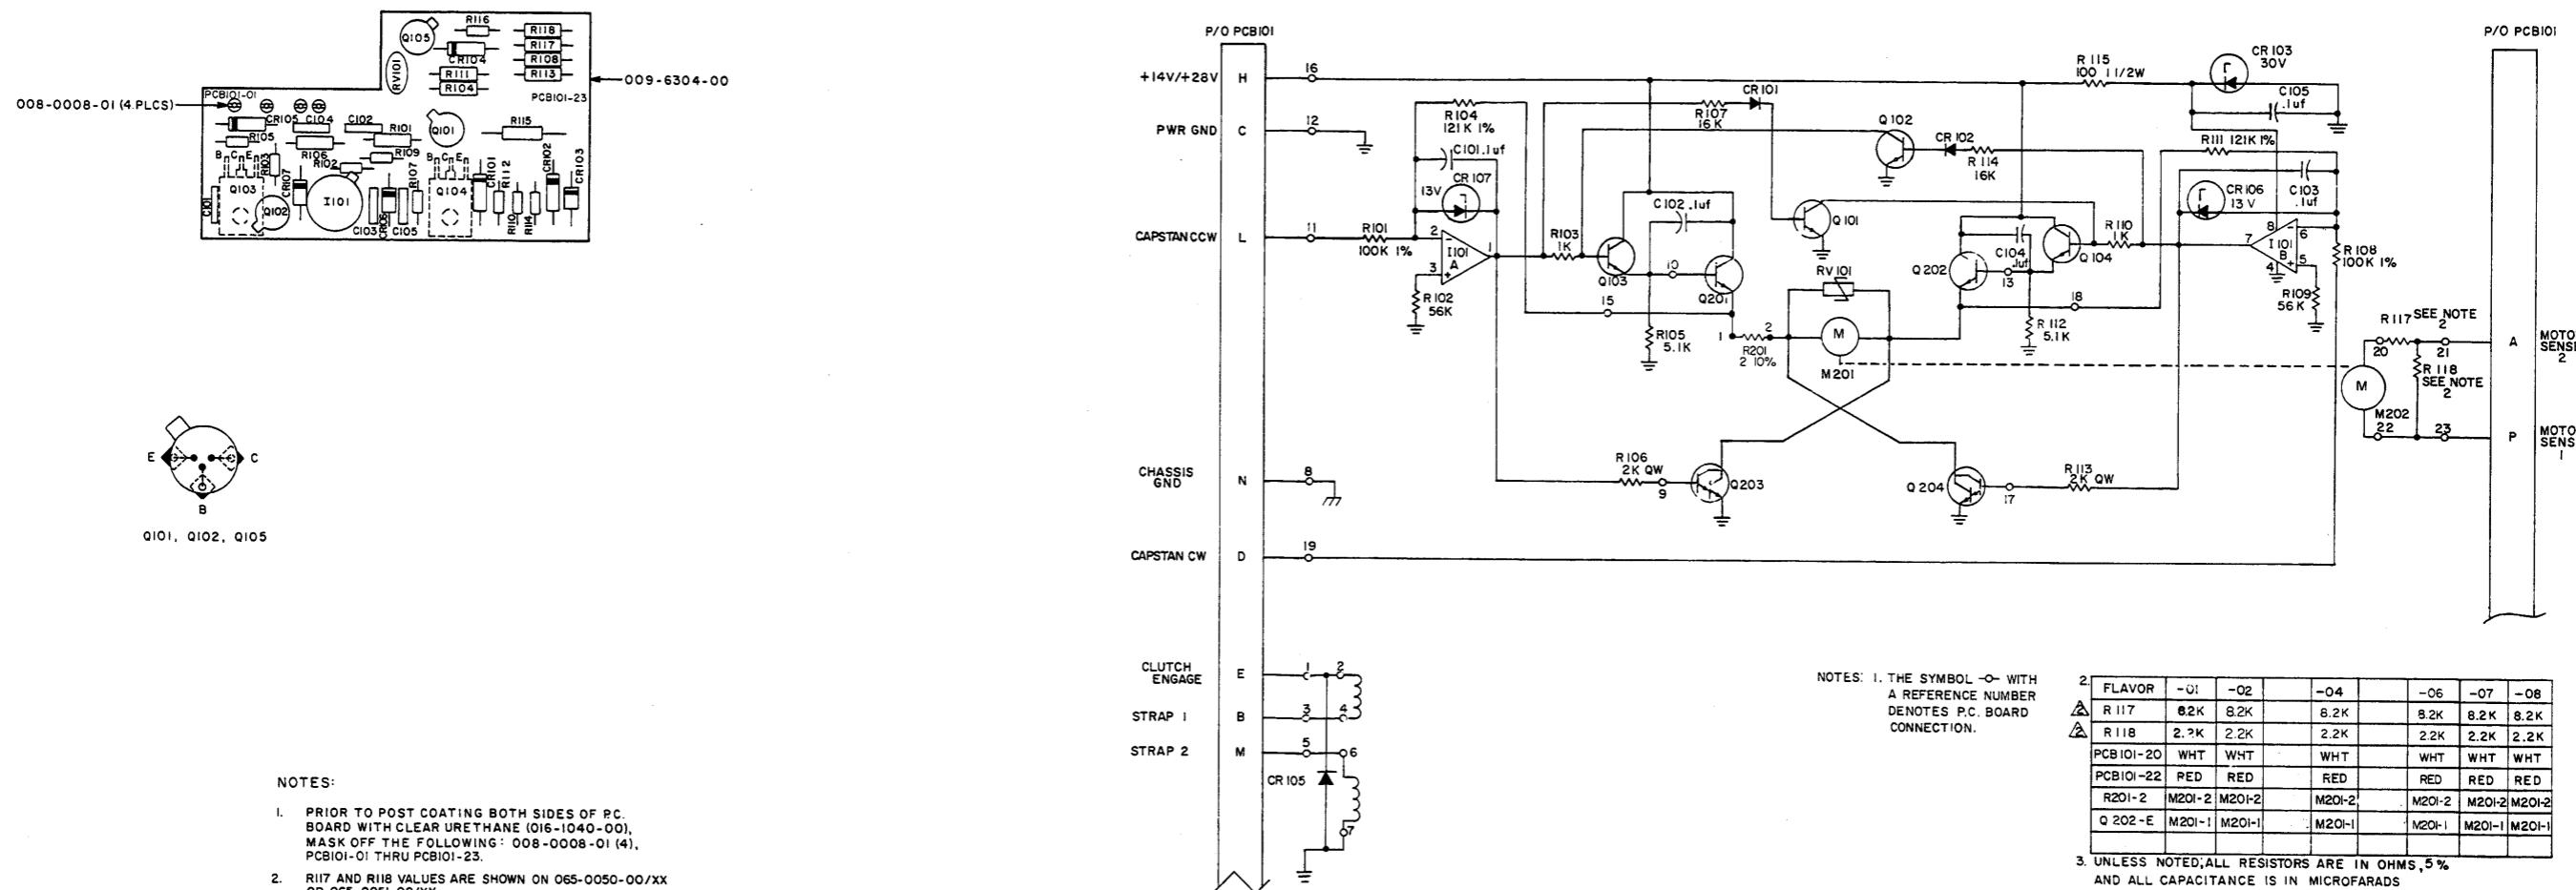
KS 178 PRIMARY SERVO P.C. BOARD ASSEMBLY AND SCHEMATIC
